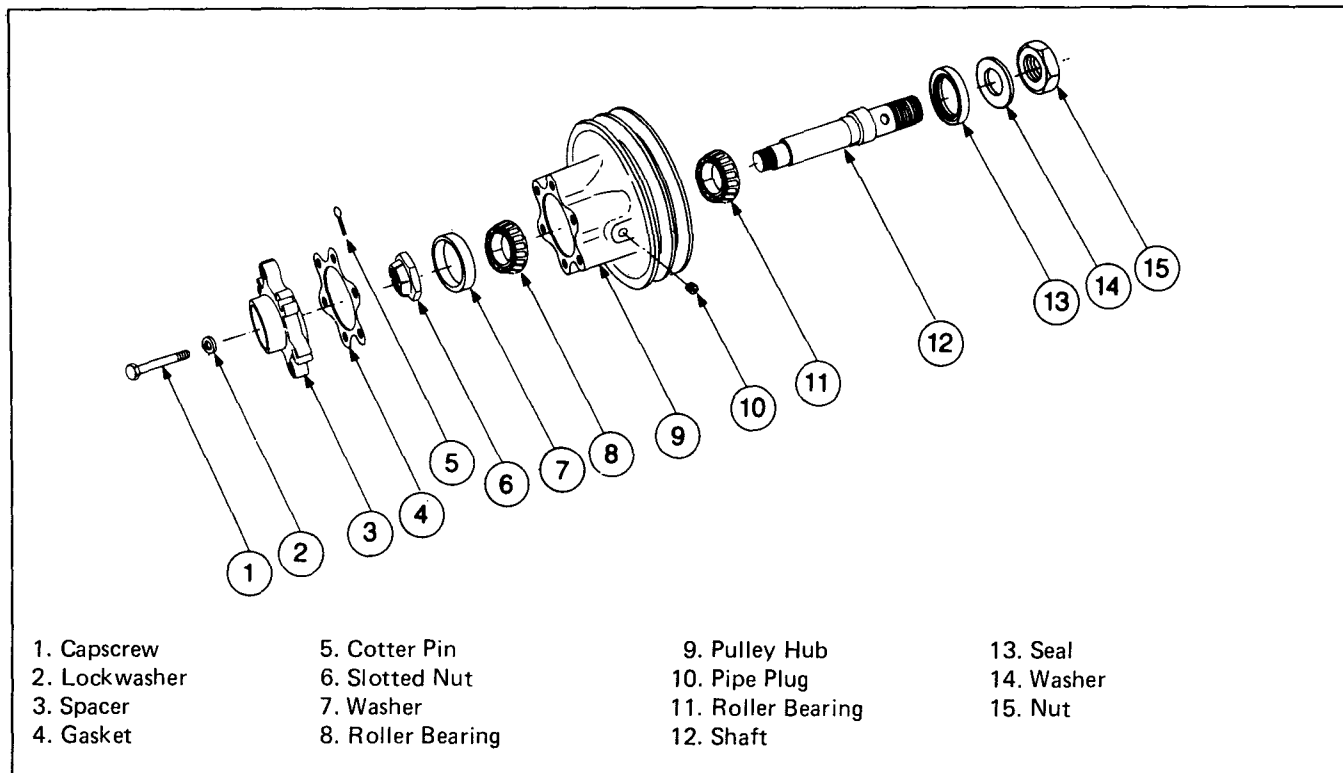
, (N10895). Fan hub assembly — exploded view
